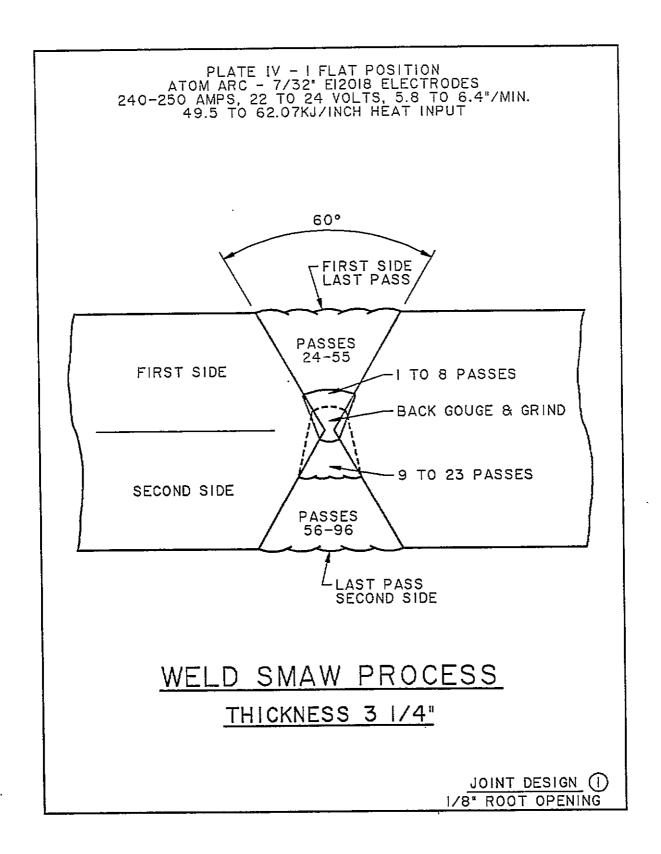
SMAW Test Assembly for 3-1/4-Inch Thick 100 ksi Yield Strength Steel Plate
